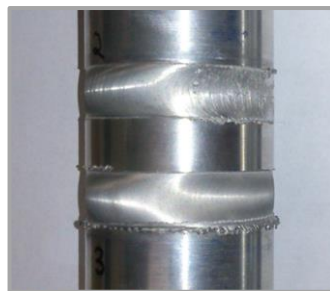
Aluminium round-tube welded by Hua et al [27]
